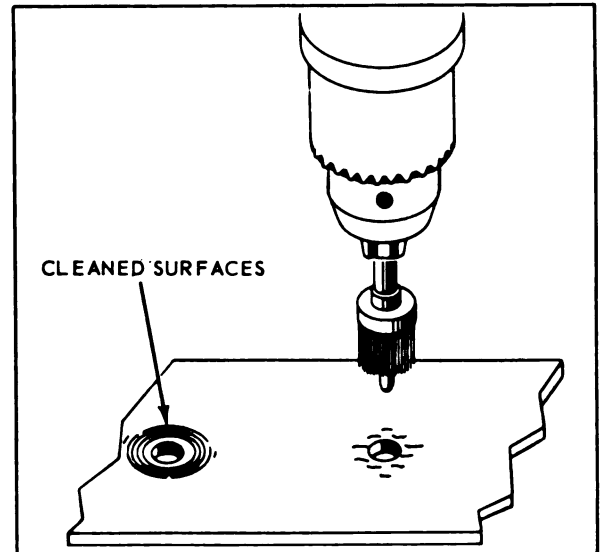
Steel Wire Brush With Pilot for Cleaning Aluminum Surfaces
